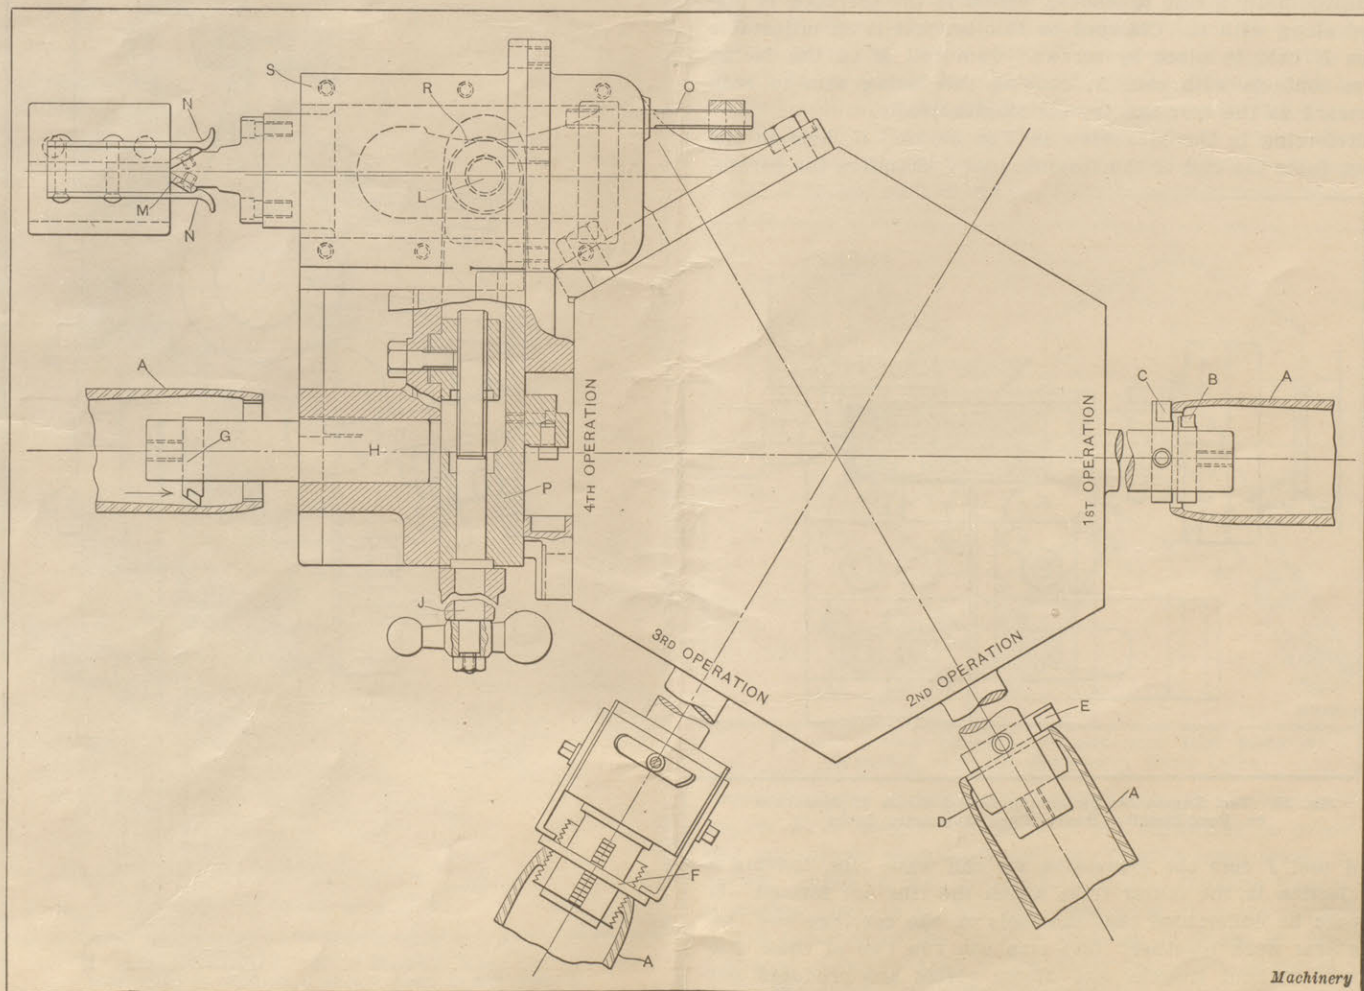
Turret Tools held on Reed 14-inch Extra-heavy Lathe for performing Fifth Series of Operations
